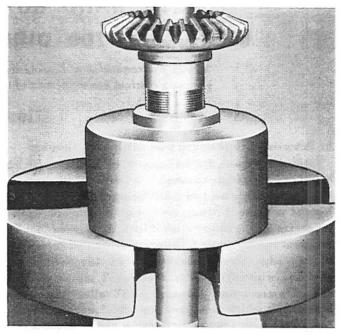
Pressing Propeller Gear from Propeller Shaft be taken here to avoid marring propeller shaft
